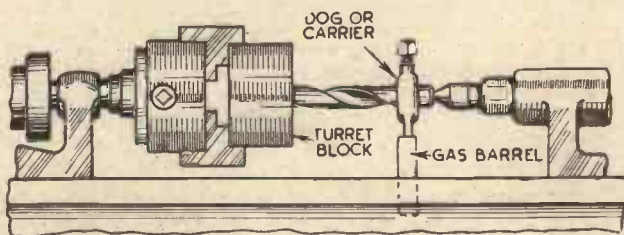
A piece of gas barrel driven on its shank depends between the lathe ways to prevent the drill turning
